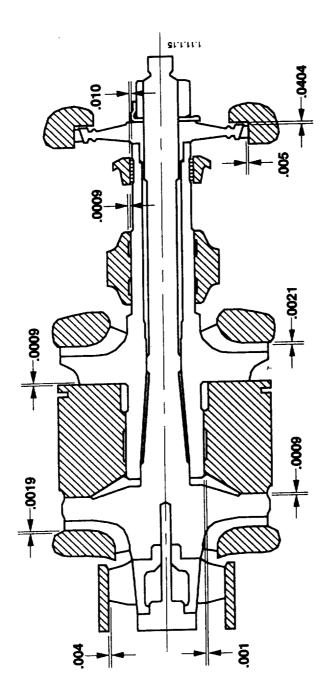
Nominal Assembly Clearances Between Rotating and Stationary Parts
